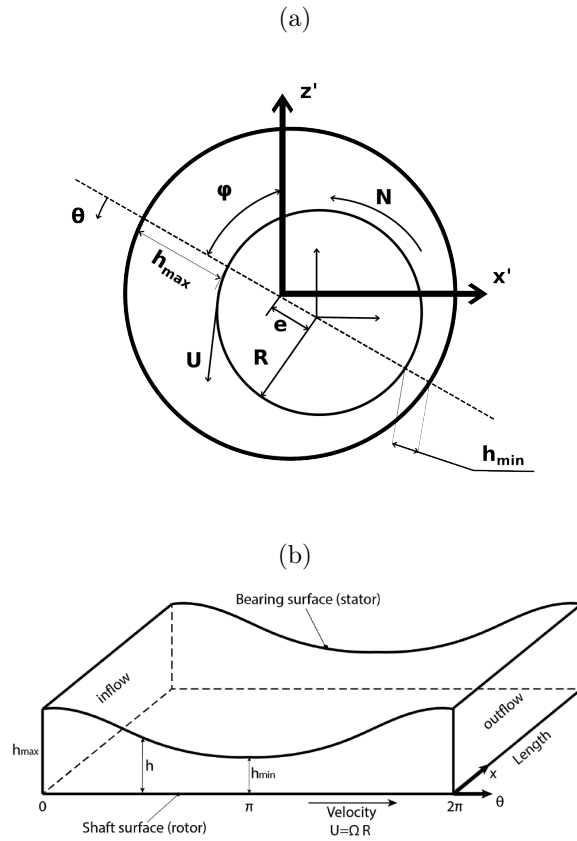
(a) Geometry of a plain journal bearing, and (b) geometry of the unwrapped lubricant film in a journal bearing.
